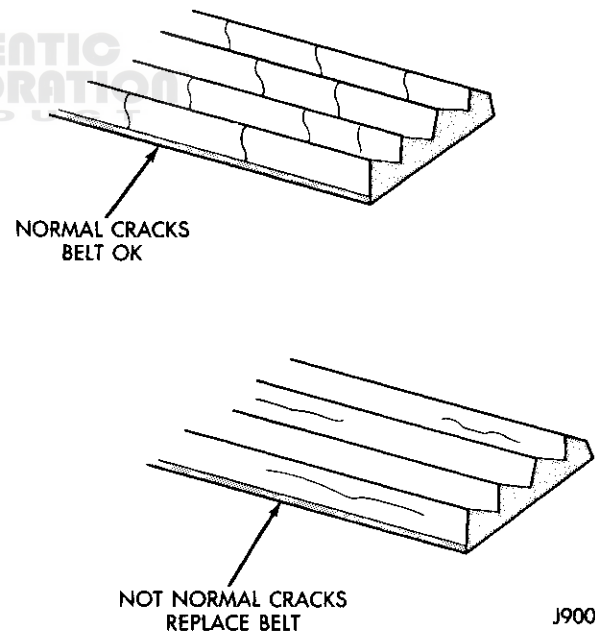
Serpentine Accessory Drive Belt Wear Patterns
